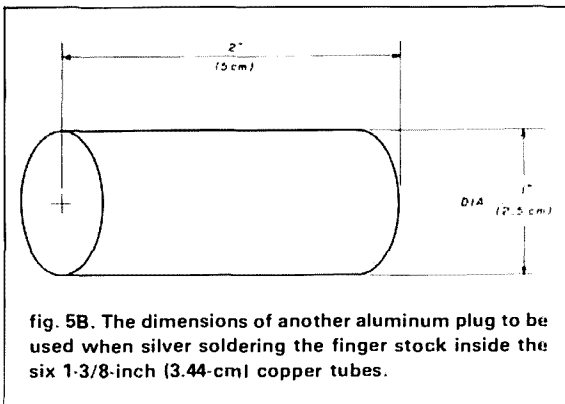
B. The dimensions of another aluminum plug to be used when silver soldering the finger stock inside the six 1-3/8-inch (3.44-cm) copper tubes.
